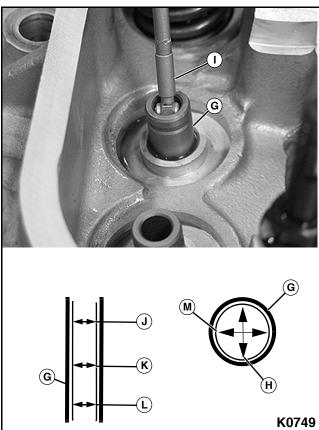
Measure the Inside Diameter of the Valve Guide
